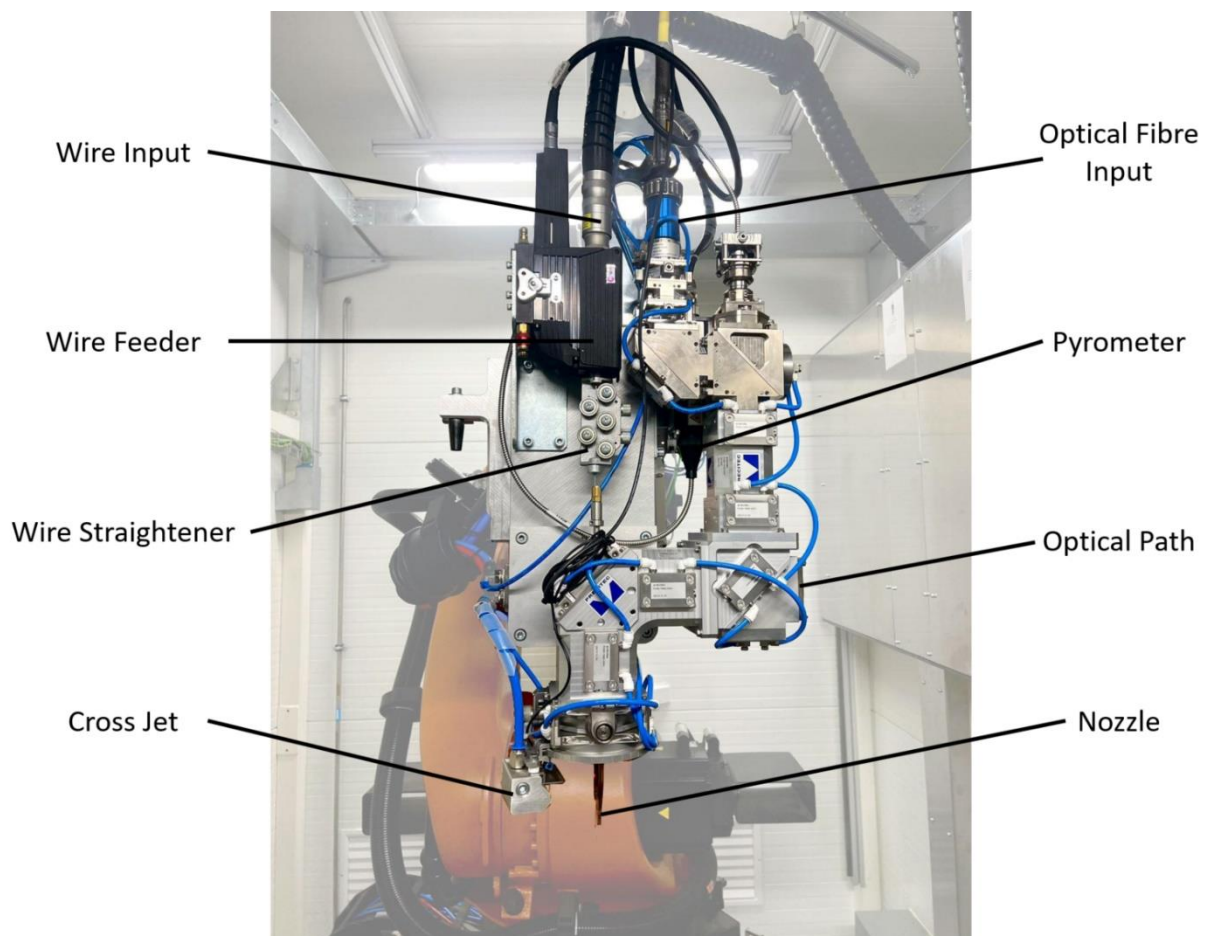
CoaxPrinter deposition Head mounted on KUKA KR-60
